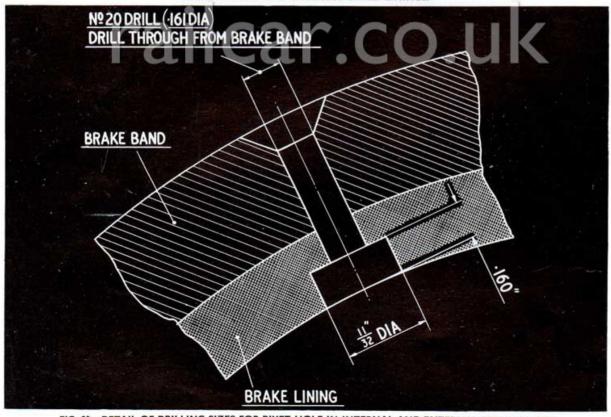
DETAIL OF DRILLING SIZES FOR RIVET HOLE IN INTERNAL AND EXTERNAL BRAKE LINING
